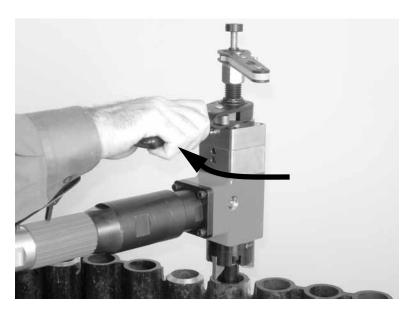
Feed the tool head into the workpiece using the feed handle.
